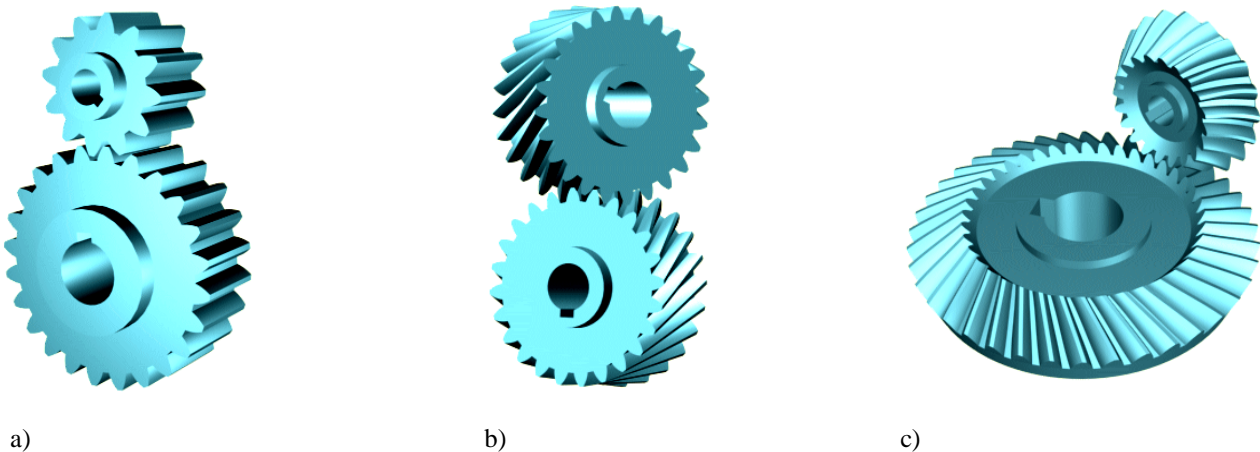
The application of the three dimensional software in gear machines: a) gear transmission of parallel axis; b) gear transmission of crossed axis; and c) gear transmission of intersected axis.
